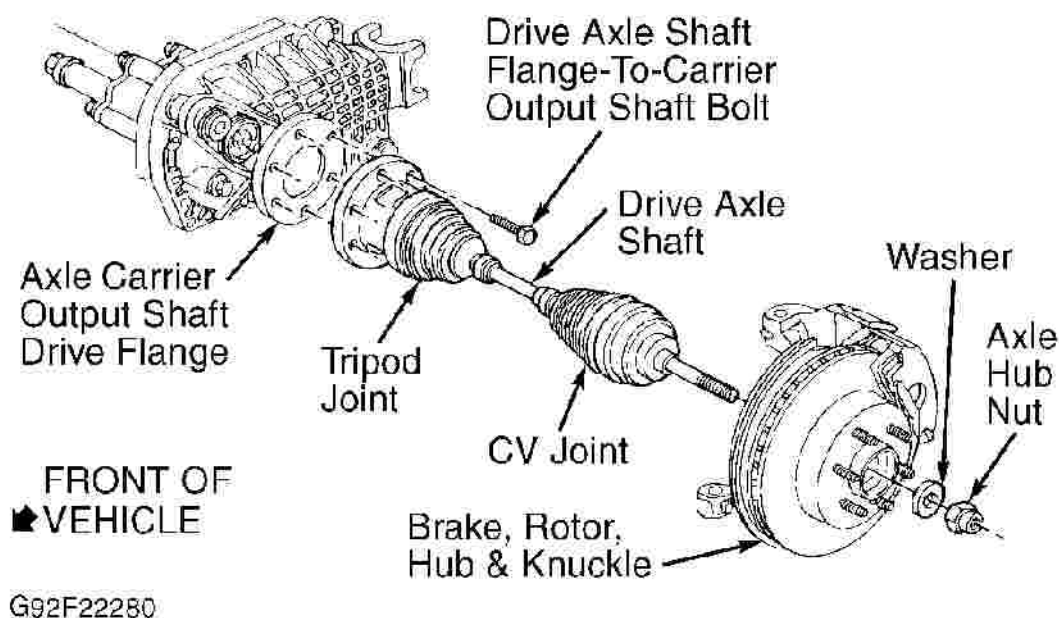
Left Drive Axle Shaft With Tripod & CV Joints
